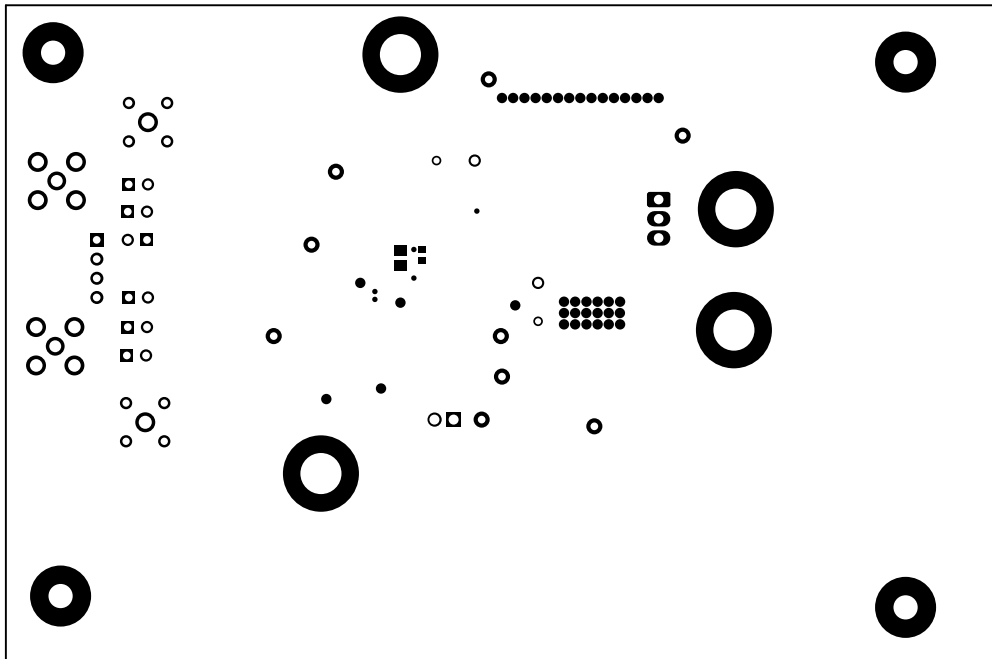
Bottom Solder Mask (TPS7H60x3EVM-CVAL)
